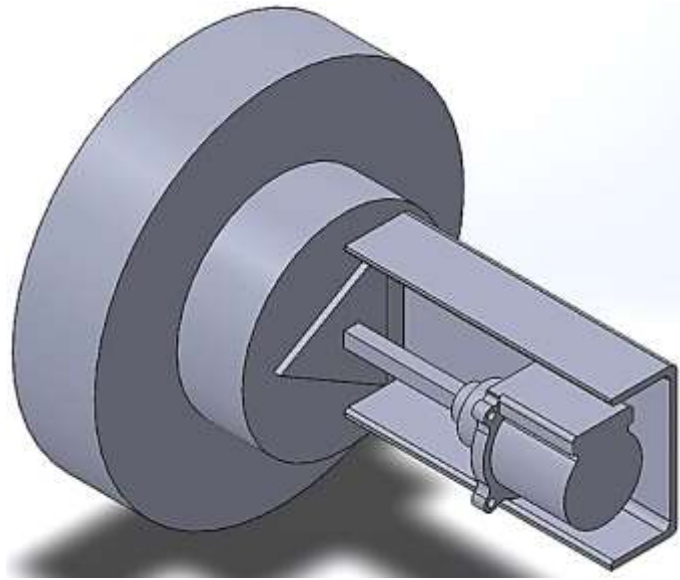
Pictorial Drawing of the Final DFH₂ Speedometer System (Side View)
